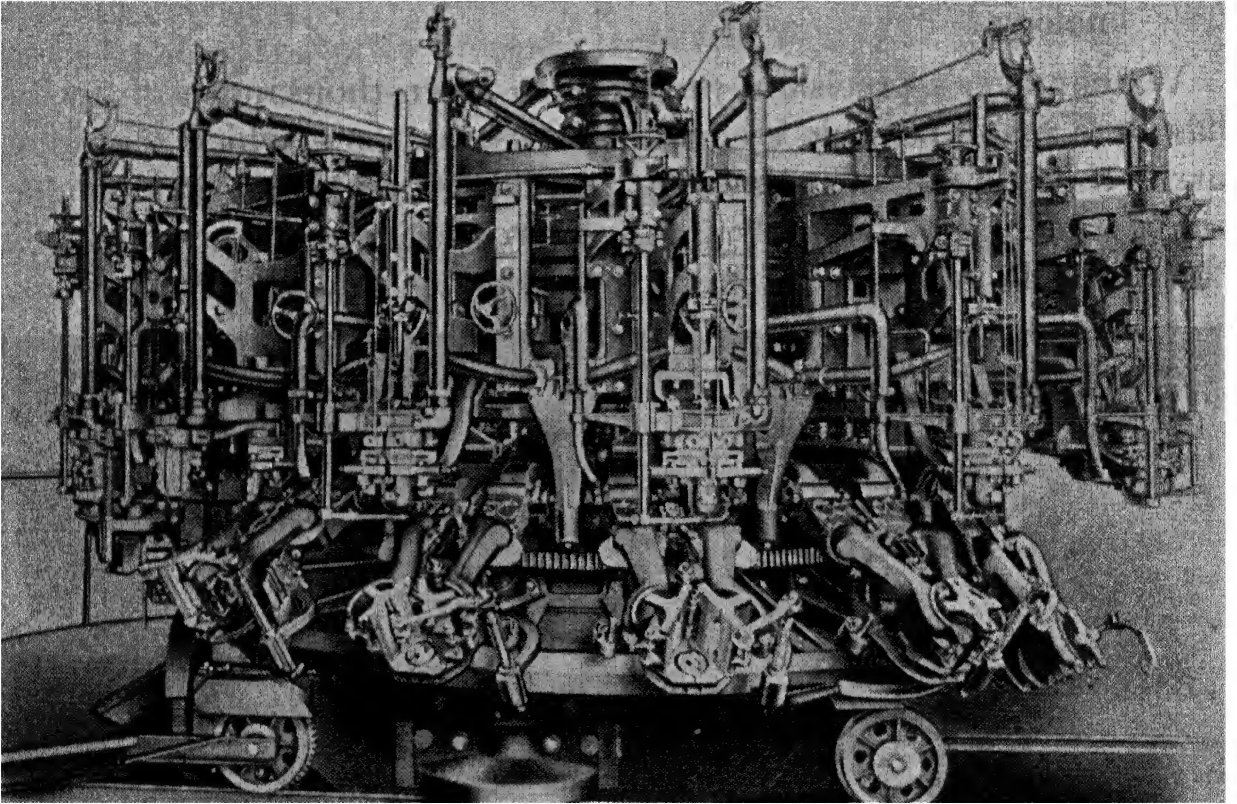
Idealistic view of a 15-arm Owens bottle blowing machine.
